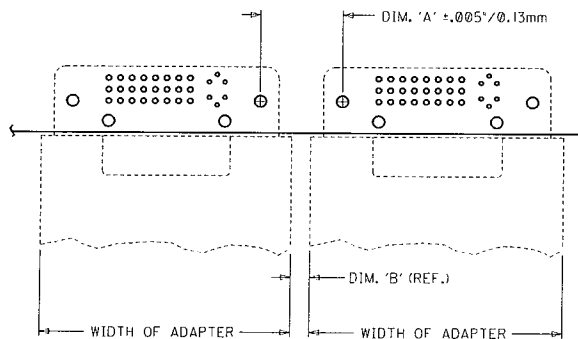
Spacing for Two or More DVI Connectors with Adapter Assembly Applications
